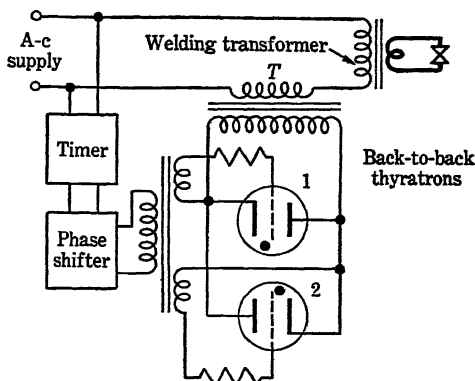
Thyatron resistance welder with timing and phase-shift controls to control the duration and magnitude of the welding current.
